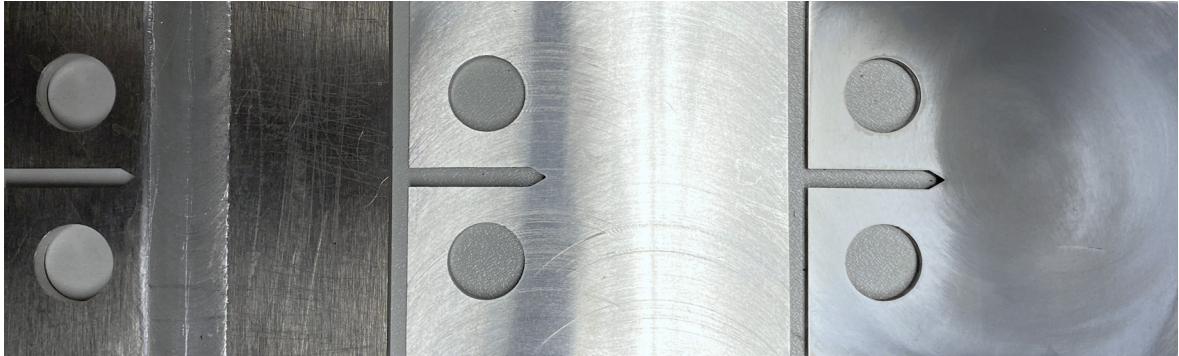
Specimen finish from left to right: in the beginning with the FSW joint easily visible, after surface milling, and after grinding with a 2500 grit wet sandpaper
